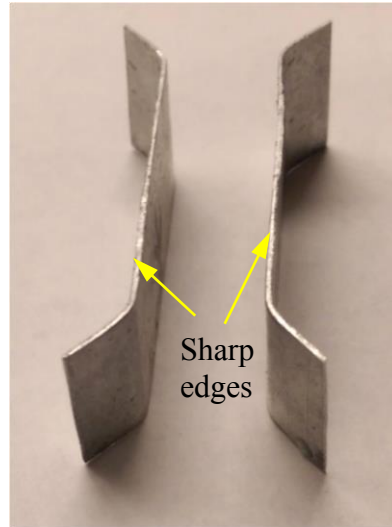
Aluminum foils used to cut tensile test samples required dimensions. One edge of each strip was sharpened like a knife to precisely cut the gel sheet. The foil strips were heated to 80°C in an oven and carefully pressed into the gel sheet in the thickness direction at right angles. As shown in Fig. 3.3, the required dog-bone gel specimens were obtained with square edges and good surface finish.
